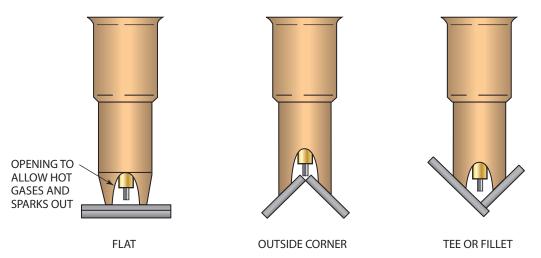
Specialized nozzles for GMA spot welding.
